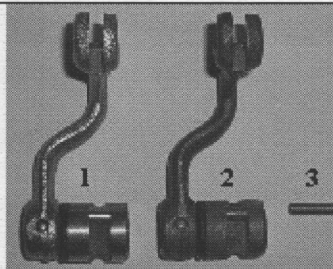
Figure E - old style cam assemblies. #1 - new old stock #2 - used cam with worn pin. #3 - new pressure pin.
